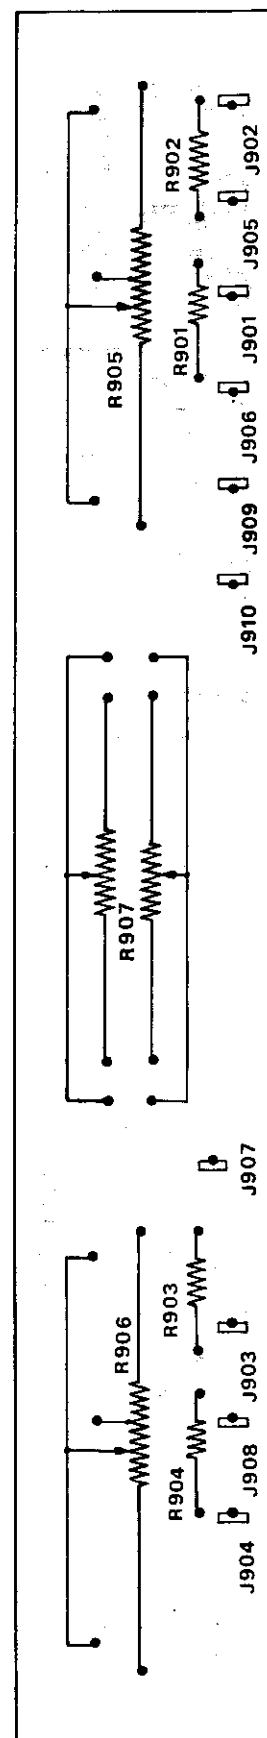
Balance Variable Resistor Unit Assembly P900 Component Locations
